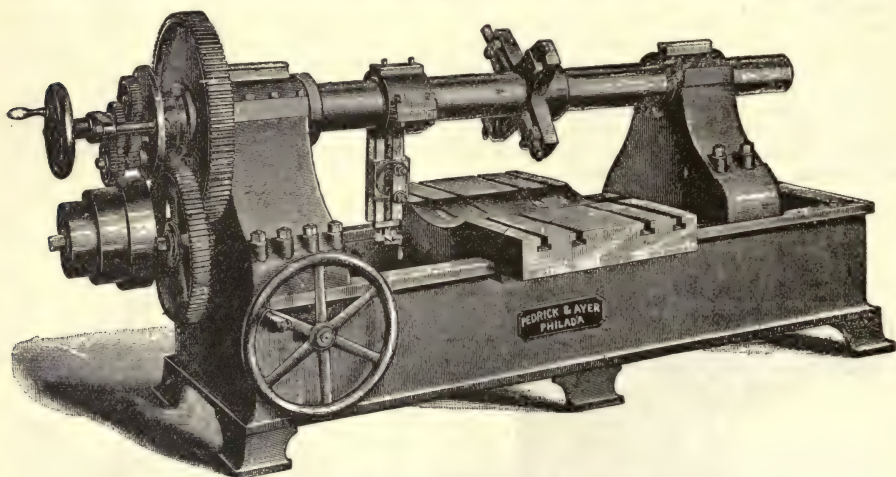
Pedrick & Ayer cylinder boring-machine.
